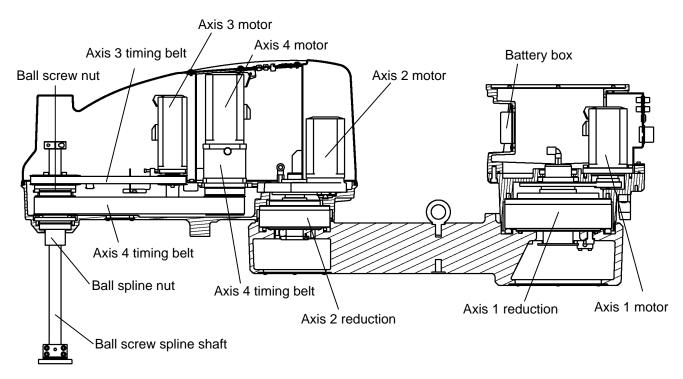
Layout of robot mechanical components (TH1050A-T)
